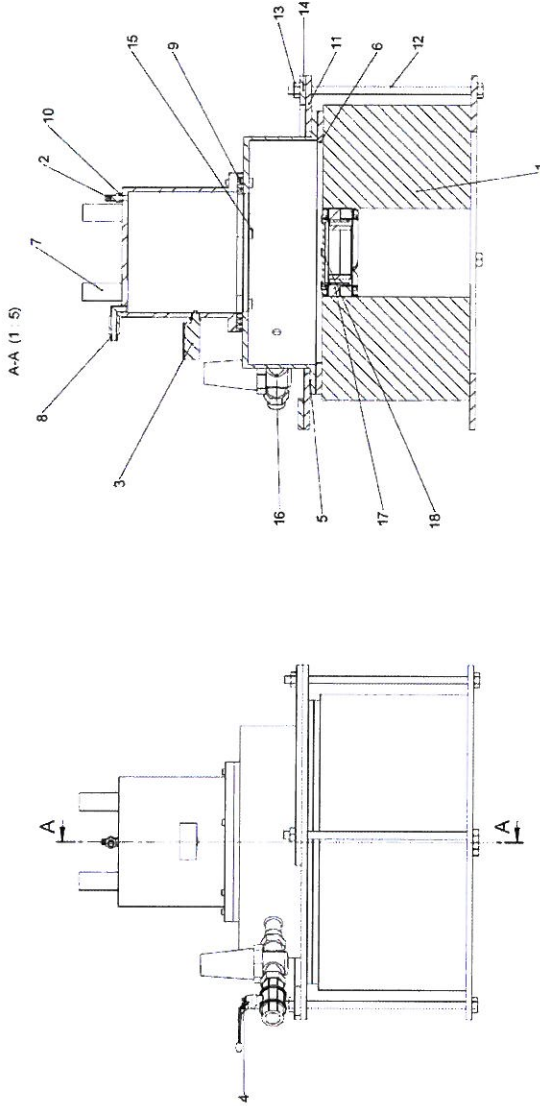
Ring seal insert HSD 150/110 with removed cover plug
